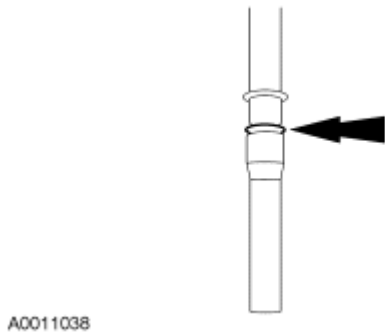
Locating O-Ring On Oil Level Indicator Tube
